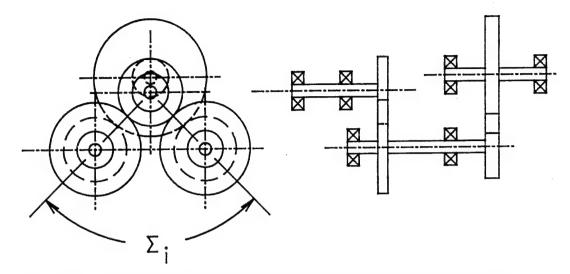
INTERMEDIATE SHAFT MOUNTINGS
